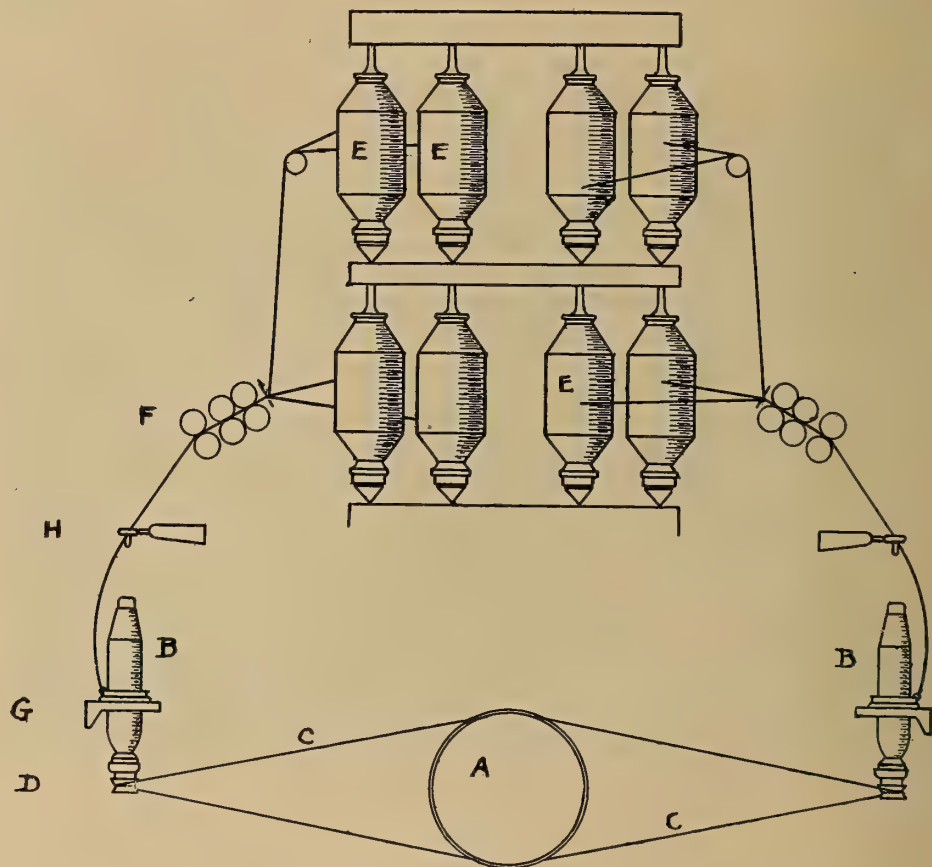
COMPONENT PARTS OF A RING SPINNING FRAME
